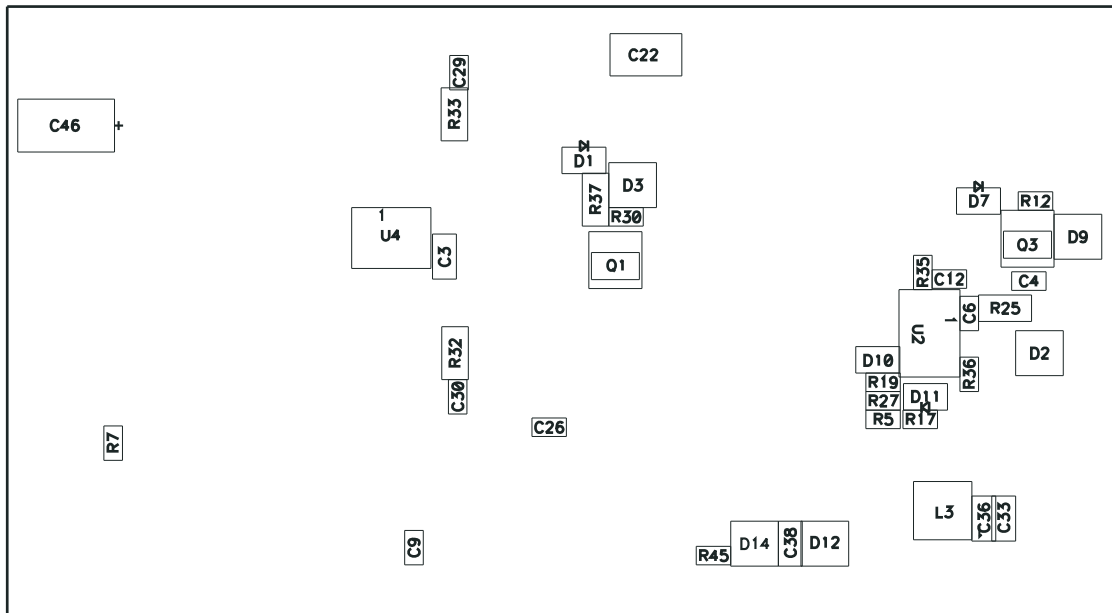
UCC25230EVM-662 Bottom Assembly Drawing (Bottom view)
